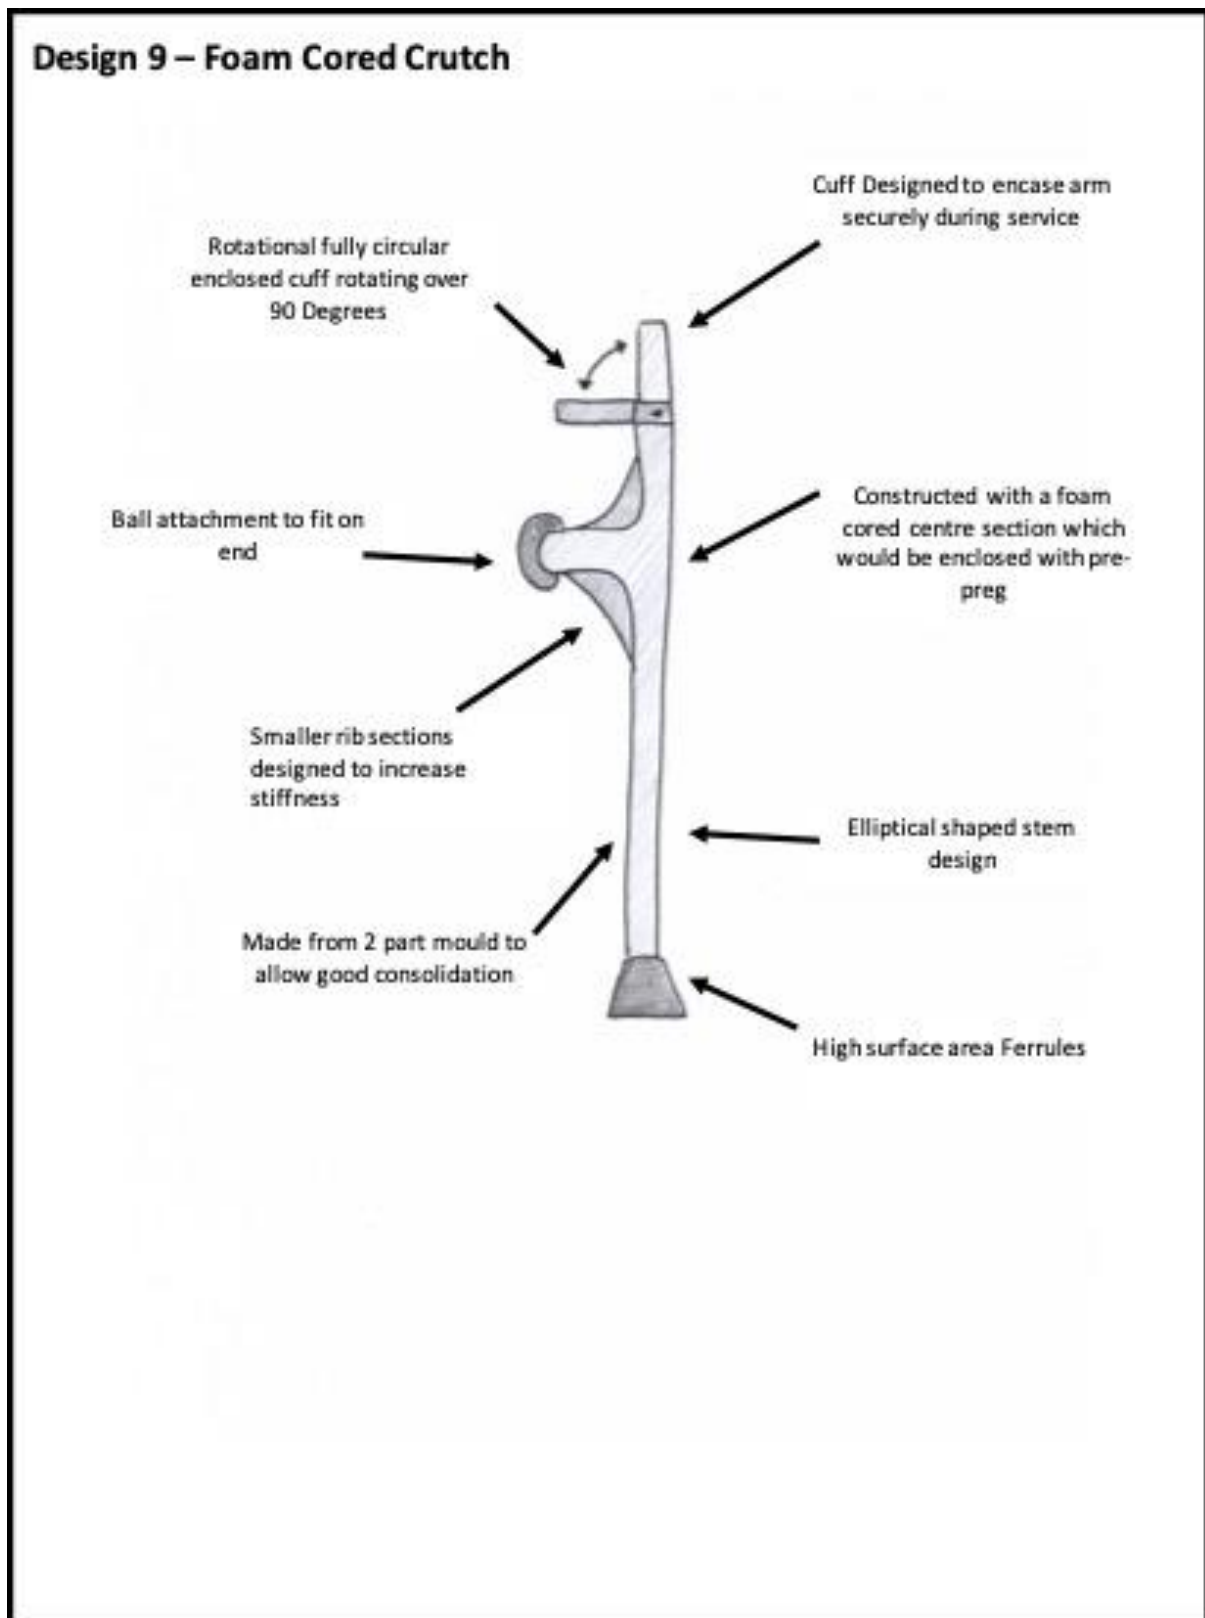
Shows the Single Piece constructed foam cored composite crutch with integrated hand grip and adjustable arm support (cuff) design.
